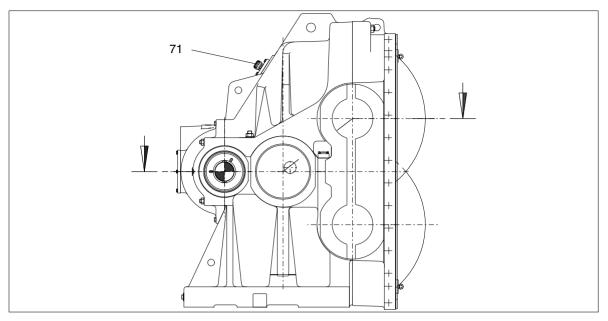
Spare-parts drawing 1/2 for drive version D/x, E/x, F/x
